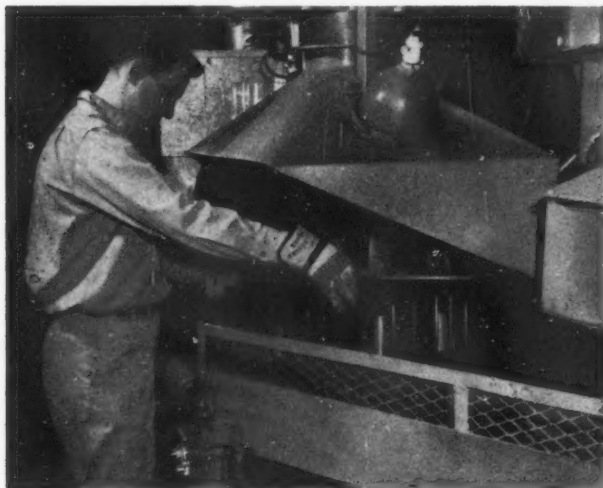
The Hardened Shell Mould is Stripped from the Heated Pattern at the Ejector Station of this Automatic 4-station Mould Making Machine. The Shell Mould is Cured at the Preceding Two Stations by Electric Heaters
